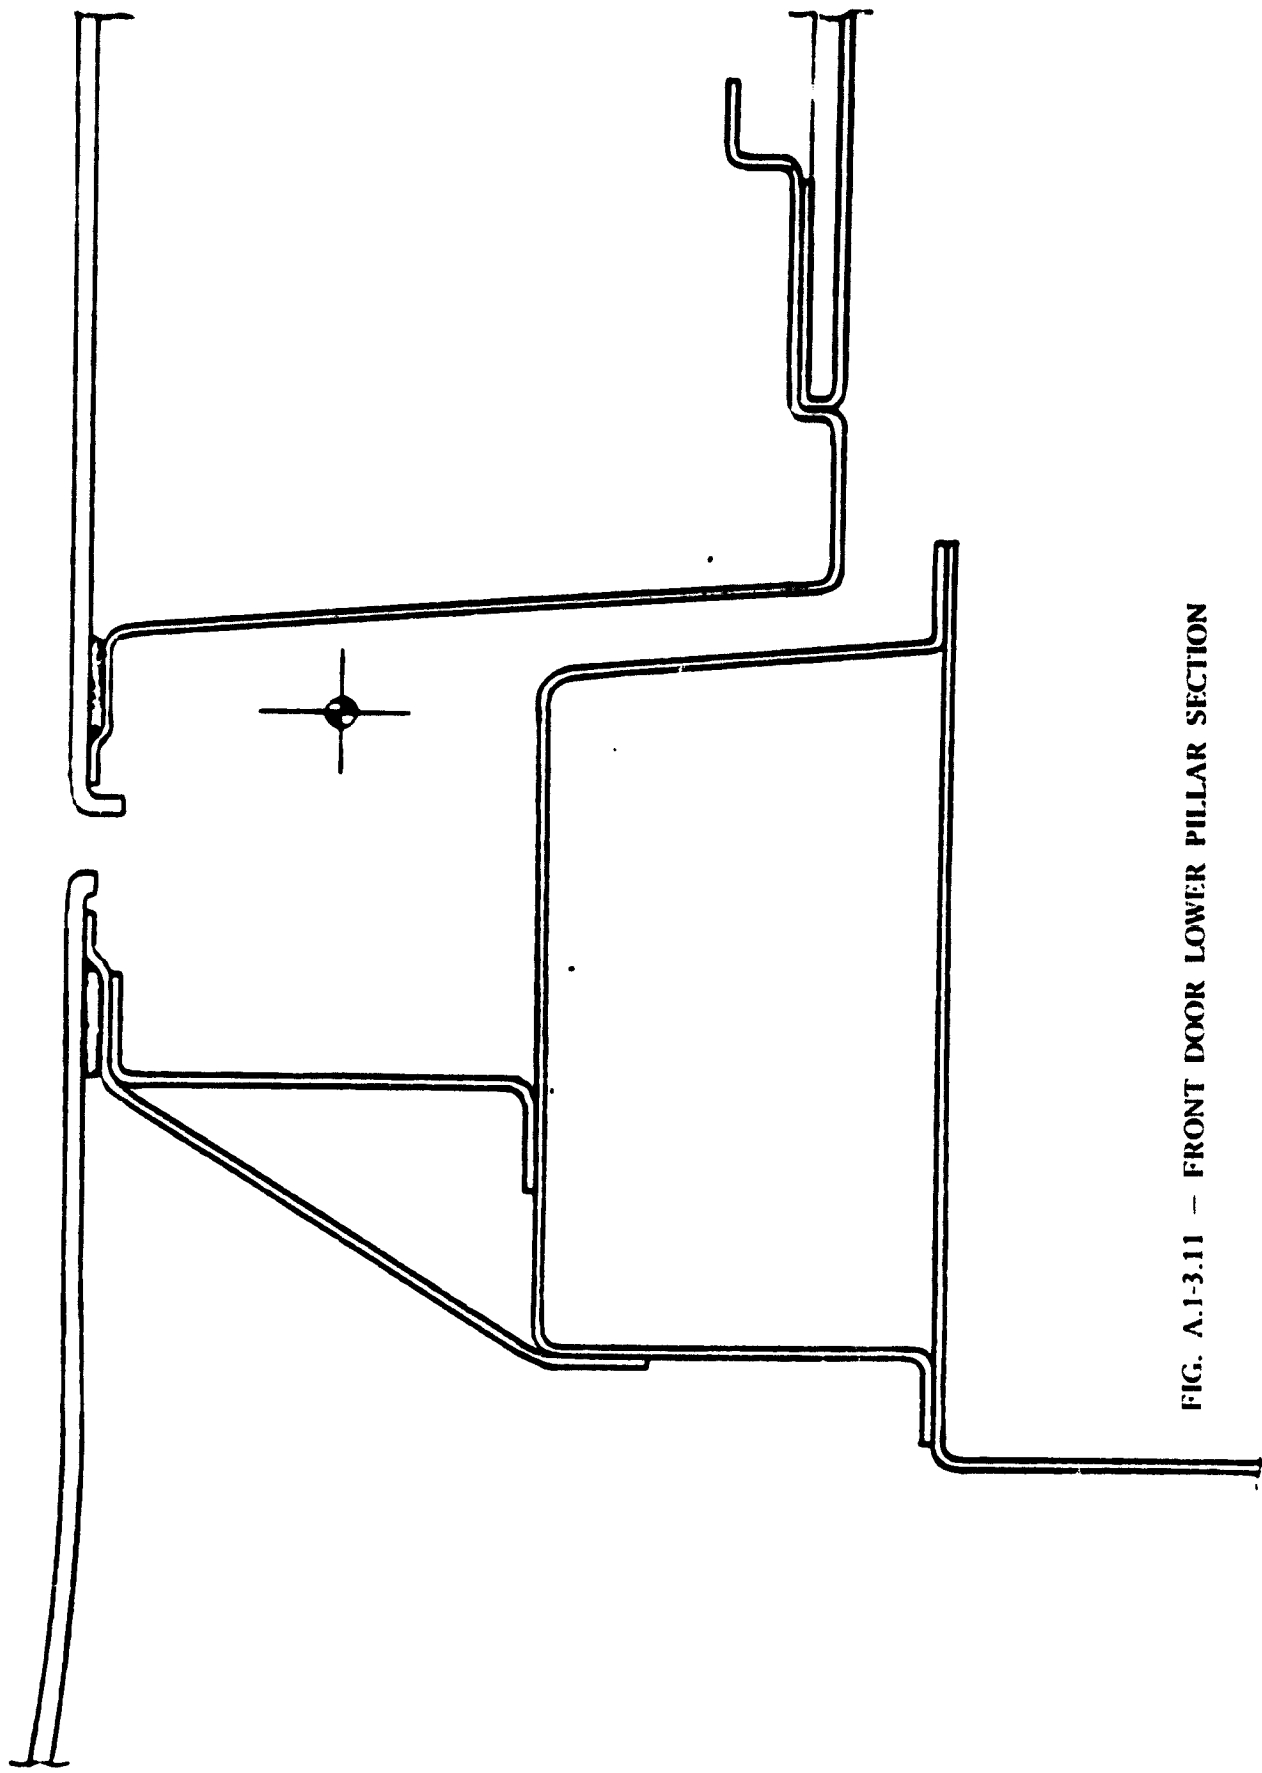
FRONT DOOR LOWER PILLAR SECTION
